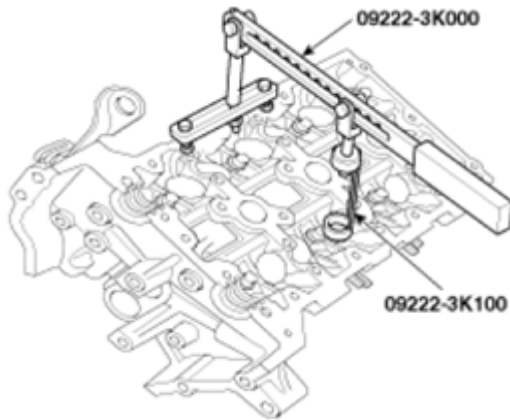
Removing Retainer Lock Using SST (09222-3K000, 09222-3K100)
